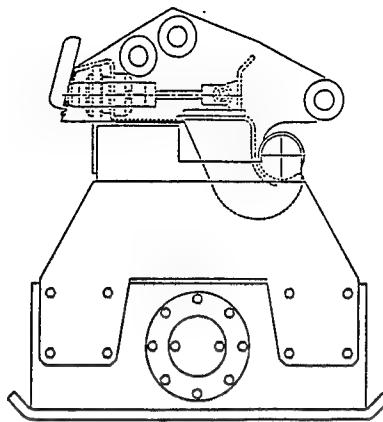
Quick-Coupler Hitch and Adapter on Hydraulic Compactor With Locking Pin Extended
